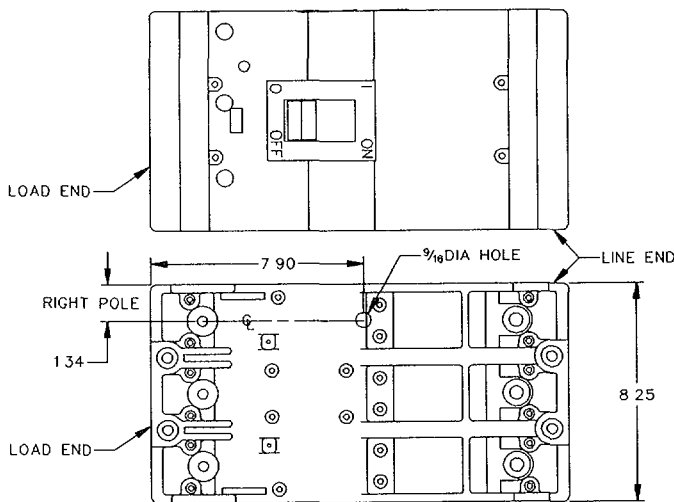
Types TKM and THKM breakers, showing the location of the hole to be drilled in the rear of the breaker case.
